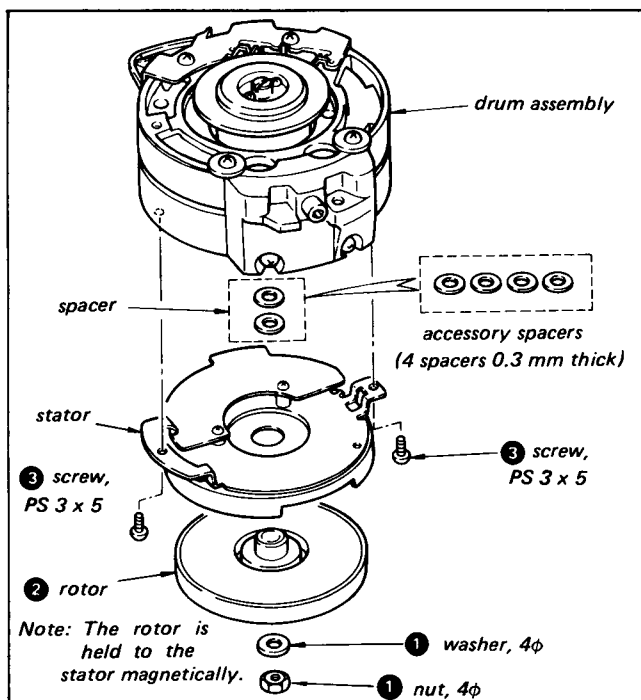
Removal of the stator and rotor when replacing the drum
